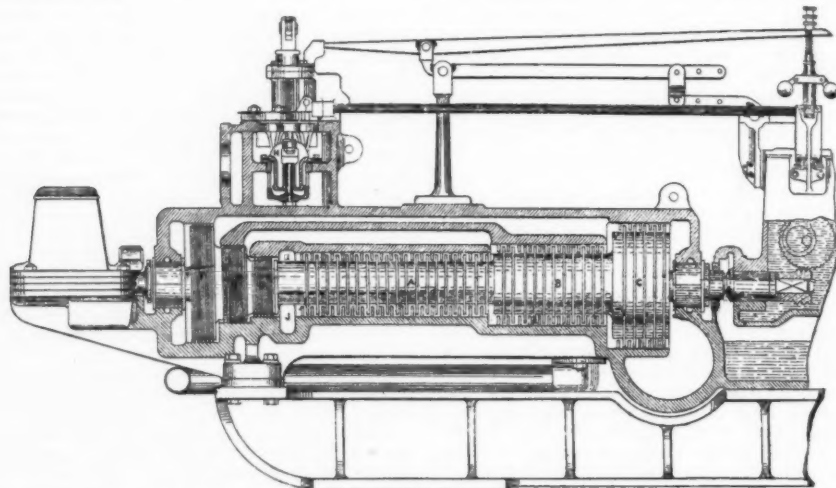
Sectional view of a Compound Turbine, showing the turbine blades and also the steam admission valve and bearings, as well as the governor gear.
